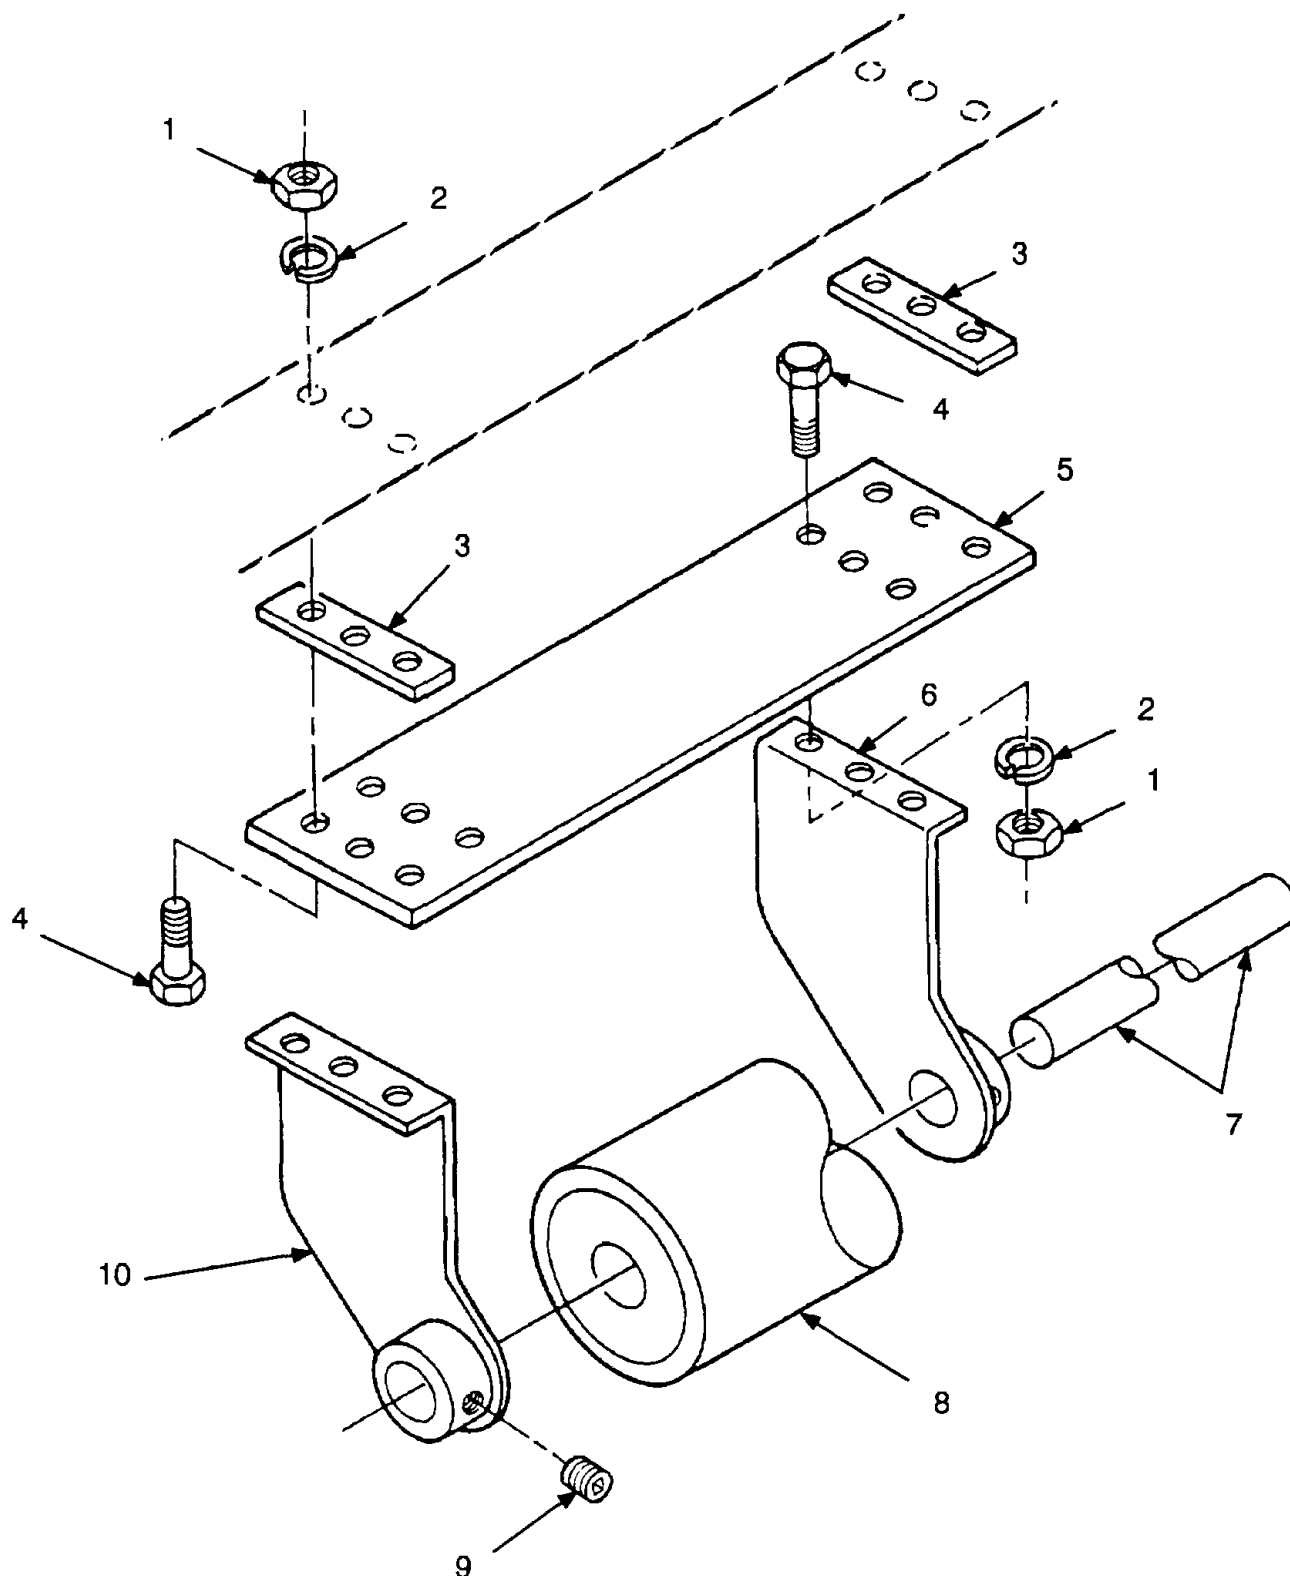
BALANCE ROLLER AND RELATED PARTS.
